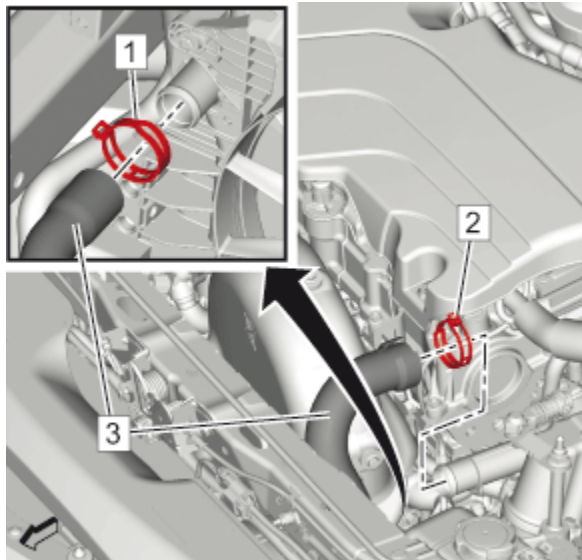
Radiator Inlet Hose Clamp And Radiator Inlet Hose
